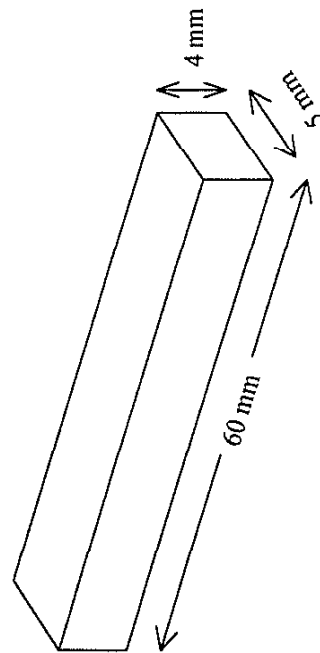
8680 Four-Point Bend Fatigue Specimen
